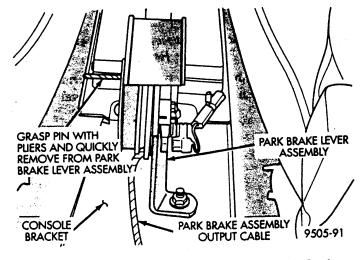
Removing Lockout Pin From Park Brake Lever Assembly
